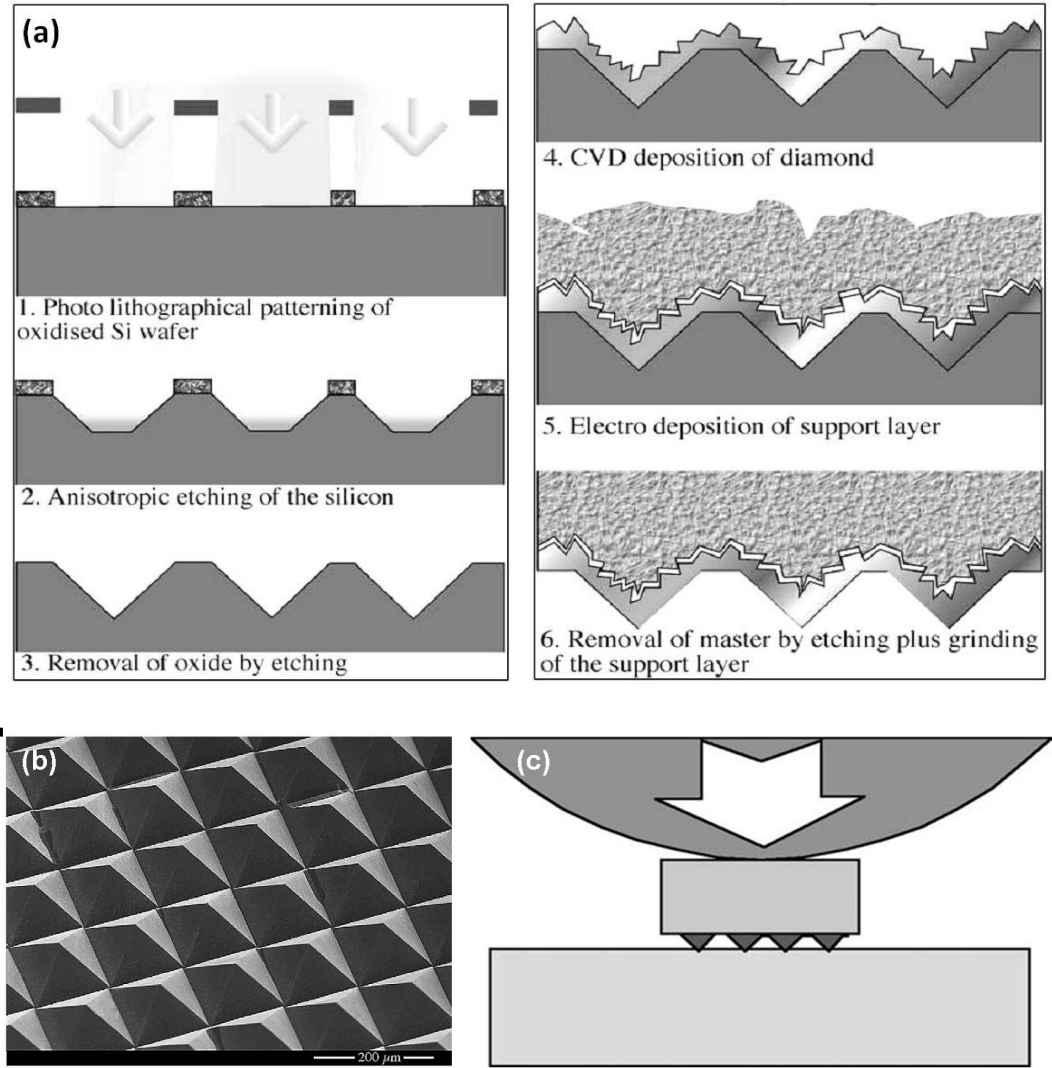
(a) Processing steps, (b) Array of diamond micro indenter and (c) Mechanical pressing process used in the diamond embossing technique ^[24]
